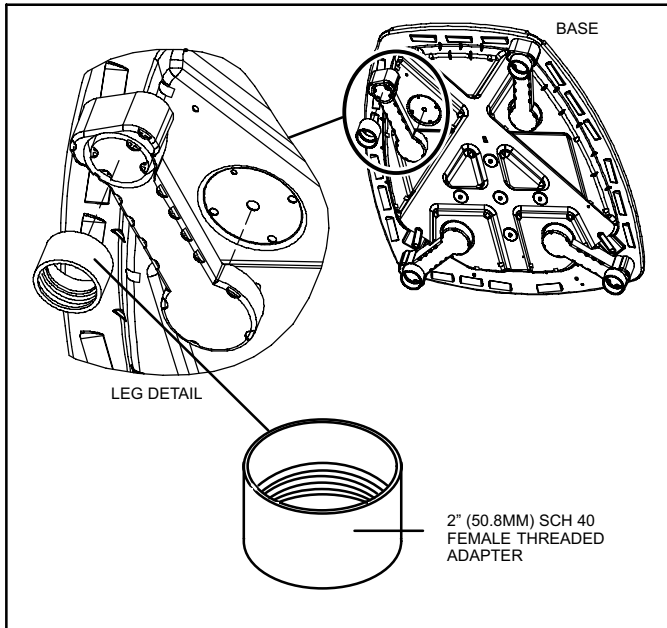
Elevated Slab Mounting using Feet Extenders (Larger Base Units)
